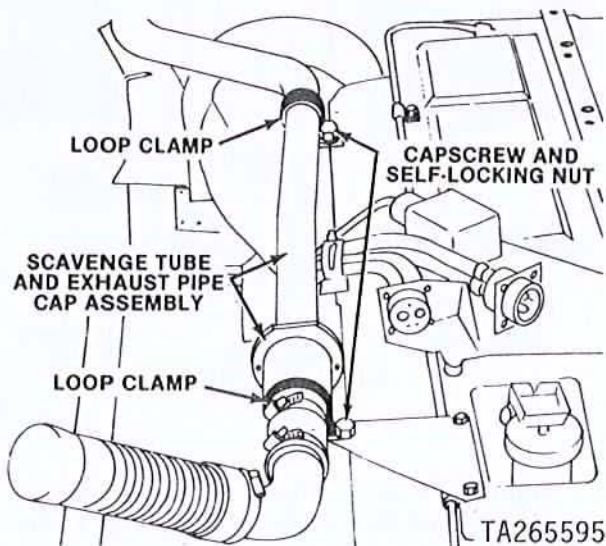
Removing or Installing Dust Ejector Scavenge Tube and Exhaust Pipe Cap Assembly
